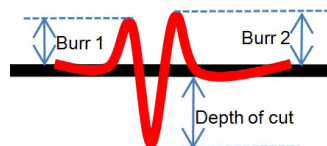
Cross section for the machined pattern demonstrating depth of cut and the burrs on its sides. (The burr height was calculated as the mean of burr 1 and burr2).
